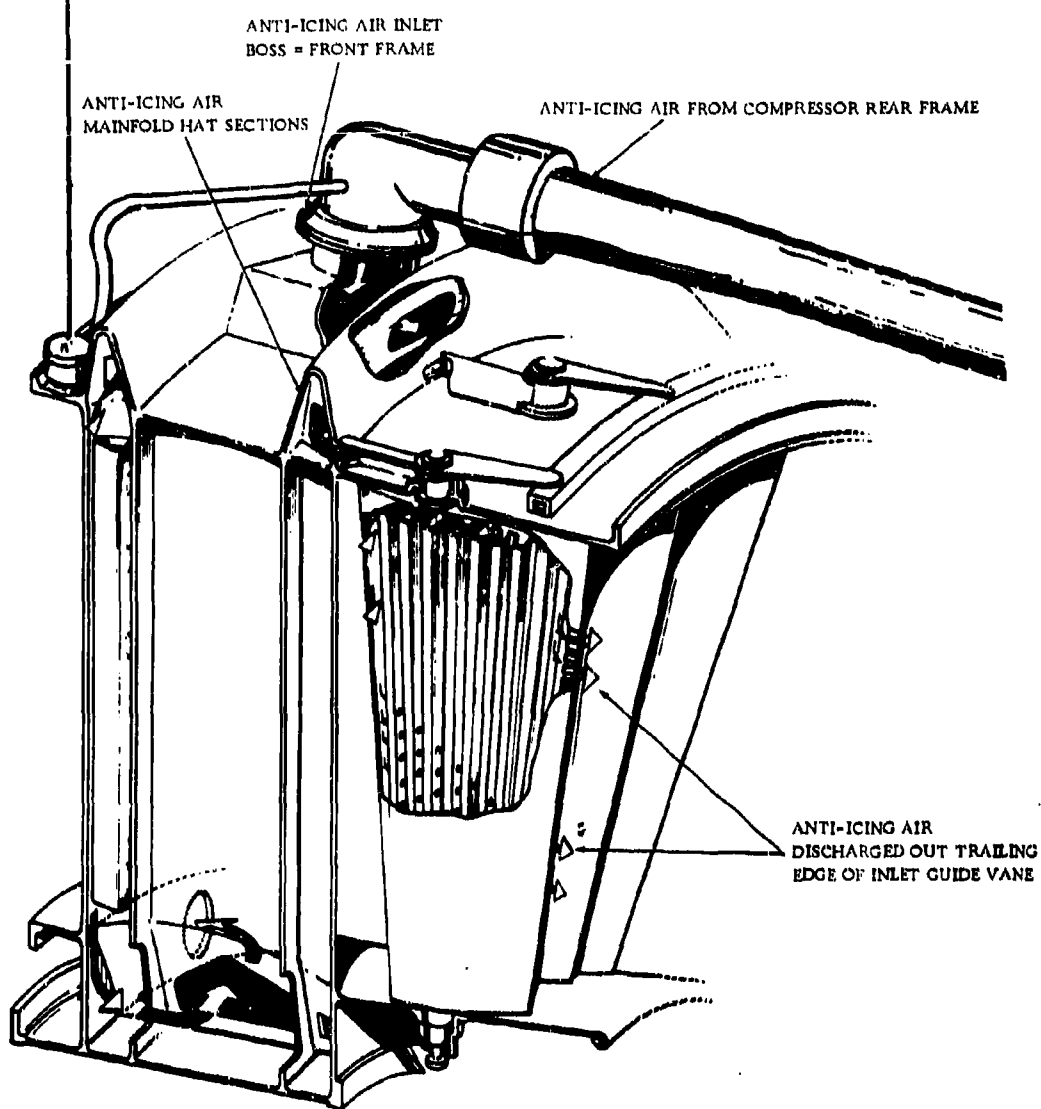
ANTI-ICING, COMPRESSOR FRONT FRAME
